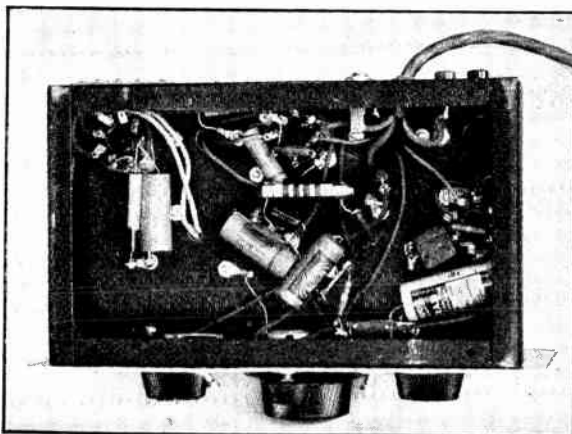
The additional parts for the audio output stage can be identified in this sub-chassis view of the three-tube receiver.
